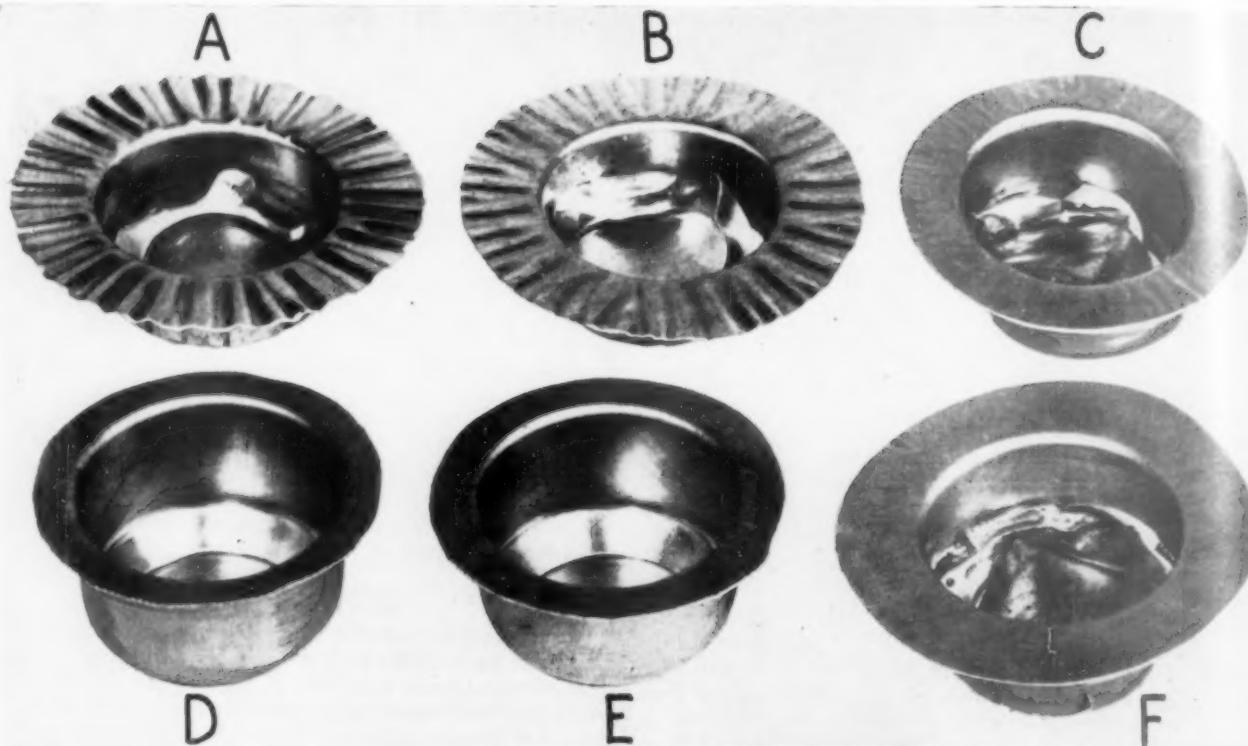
, showing six shells which have been drawn under as many different pressure settings. Shell A, which has a severely wrinkled flange, was drawn with too much flow space between the blankholding faces. Shell B, drawn with the blankholder adjusted closer to the die, has shallower wrinkles in the flange although these are still too deep to permit good flow. Further adjustment produced shell C, deeper than shell B because of greater flow but yet sufficiently wrinkled to cause fracture. Shells D and E were the result of successively reducing the blankholding space, and both are sufficiently free of wrinkles to be accepted as typical pressings. Adjusting the blankholder still closer to the die resulted in pressure sufficient to trap movement and cause fracture, as indicated by shell F.
